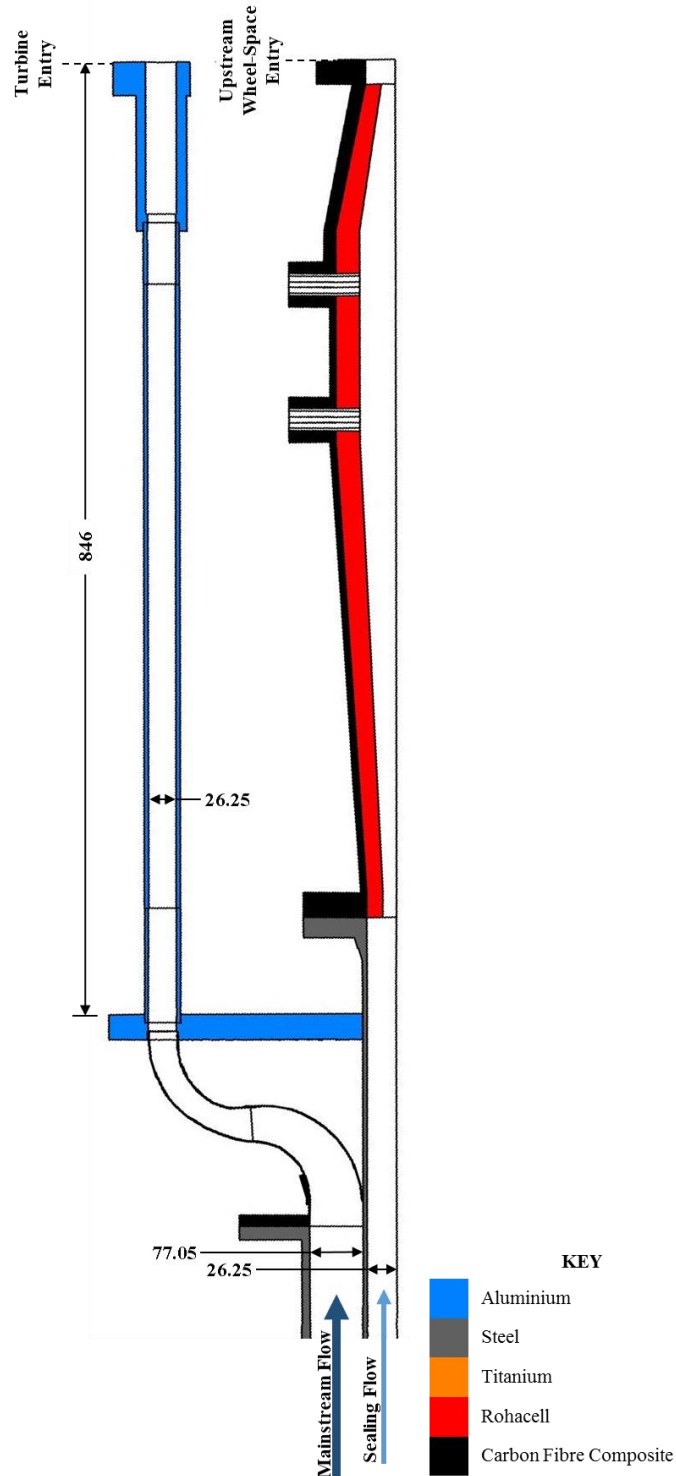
Cross-section of mainstream and upstream sealing flow supply assemblies indicating the materials used and important dimensions (all dimensions in mm)
